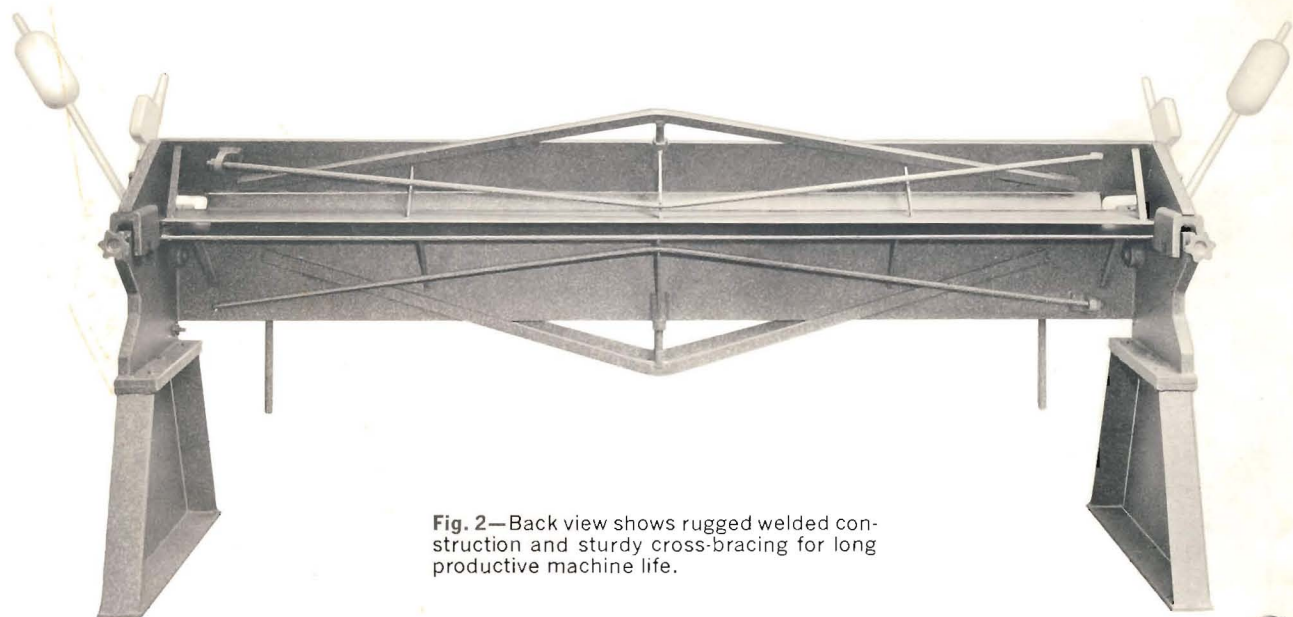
Back view shows rugged welded construction and sturdy cross-bracing for long productive machine life.
